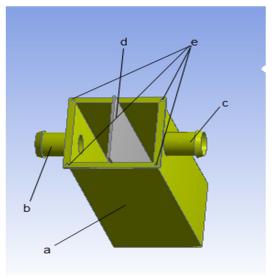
Configuration of coolant sys. a: shell; b: coolant inlet; c: coolant outlet; d: Sliding door Separator inlet and outlet coolant section; e: Clapboard
